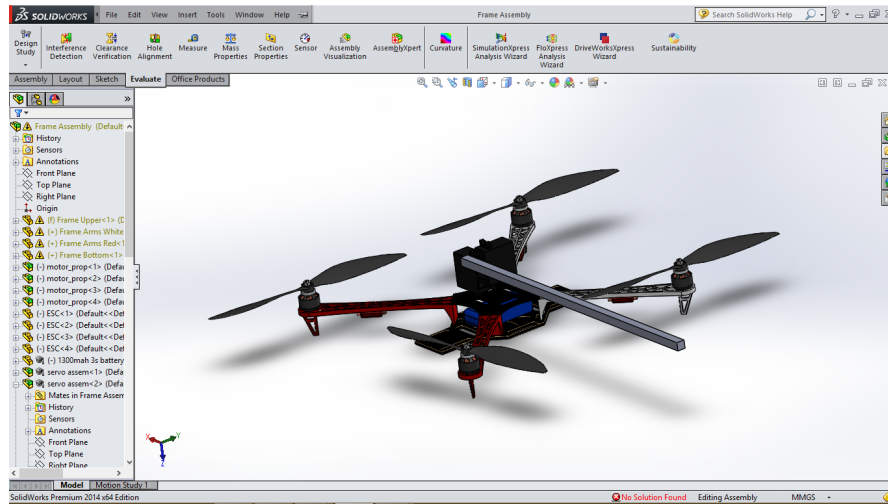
Solidworks assembly of the quad with the initial manipulator designed
